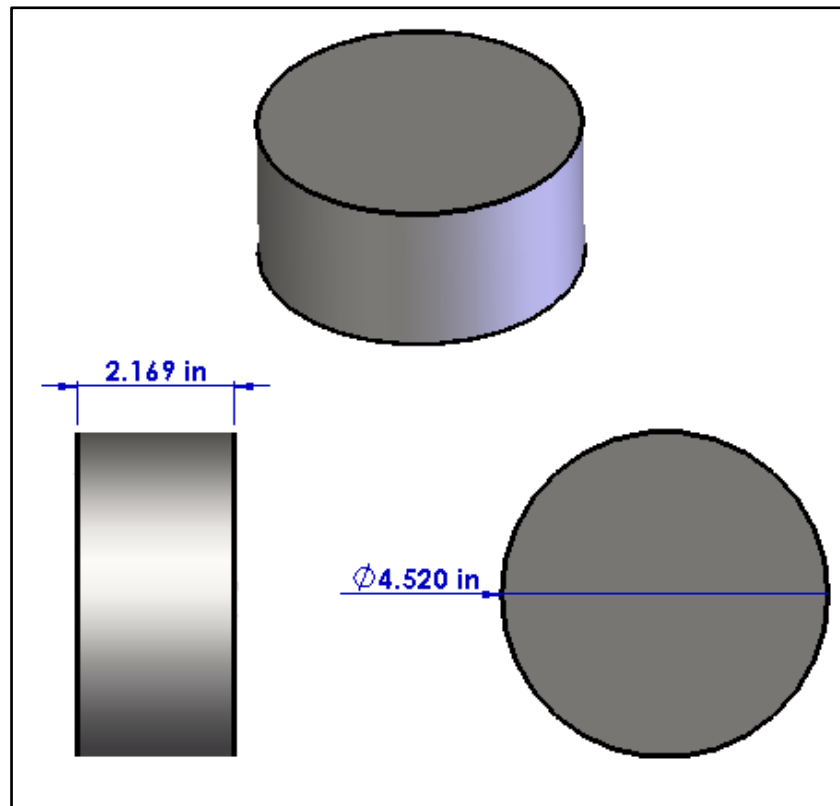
Piezoelectric Shaker Table Spacer Component Dimensions
